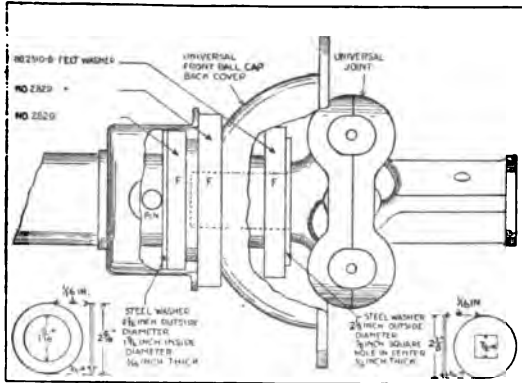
Remedying excess of oil leakage out of wheel bearings: The oil from the transmission works down the drive shaft, through the universal joint through the differential out the axle ends, causing an excess of oil on the brakes.
